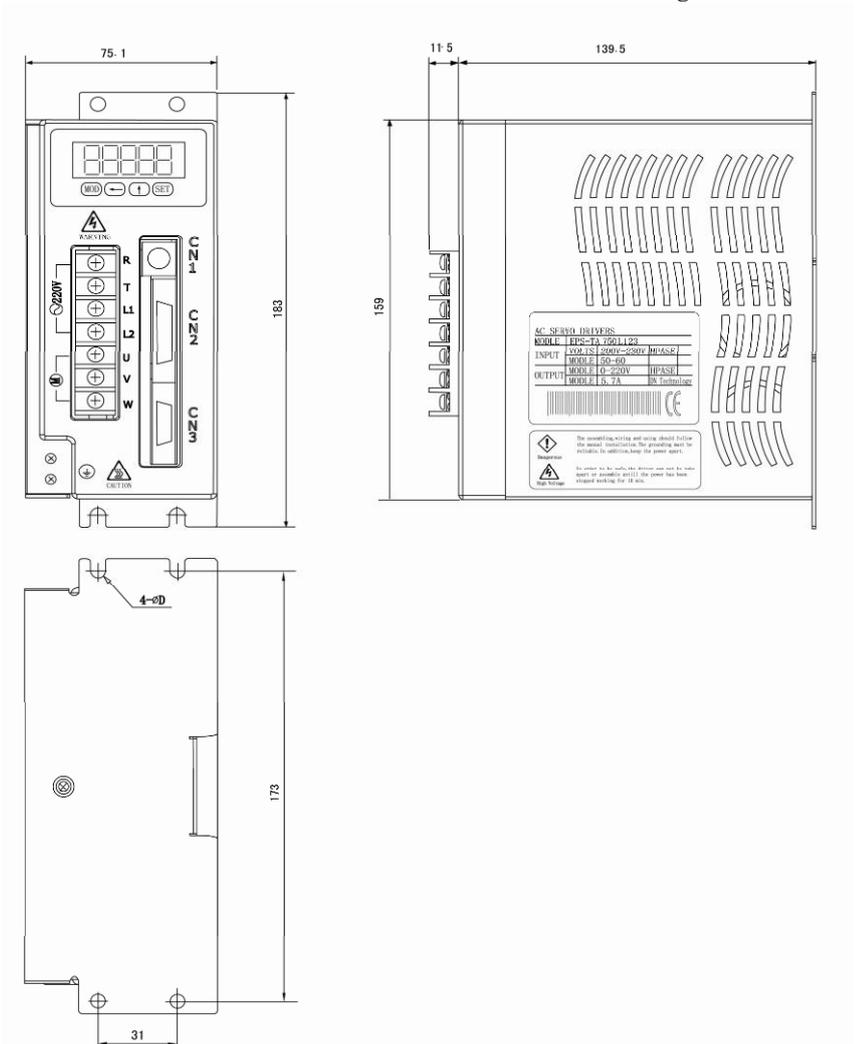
EPS1—040 servo motor driver dimensions (Unit: mm)
